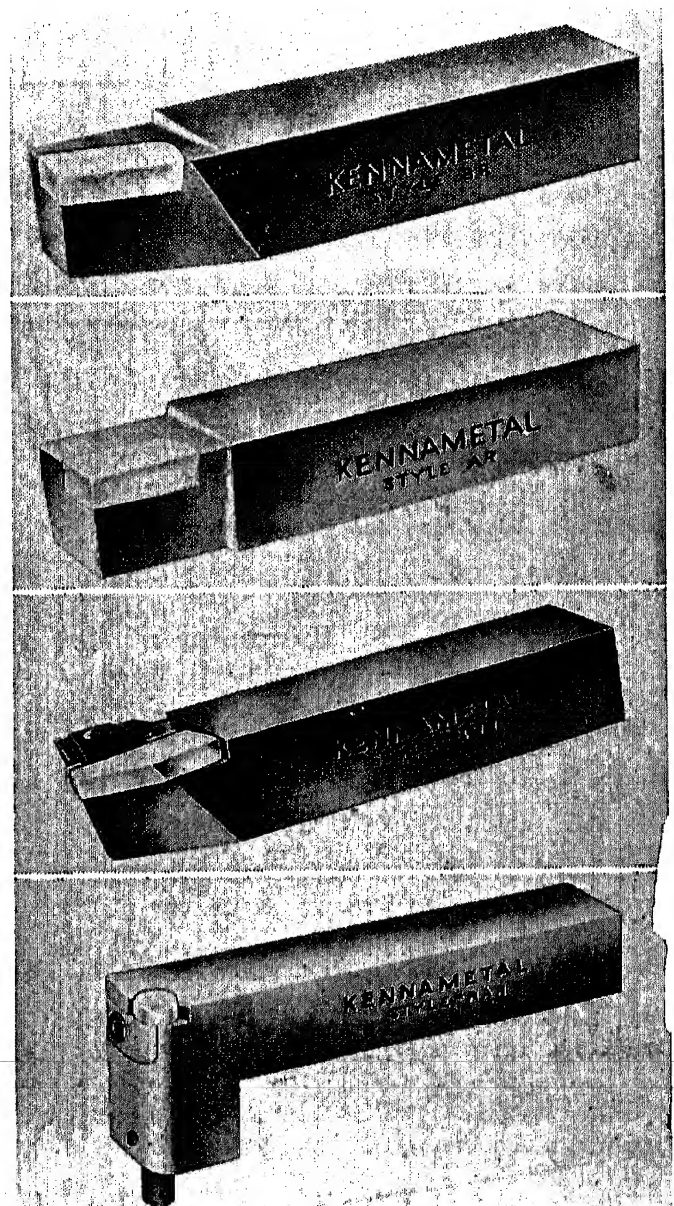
Typical cemented carbide tipped tools. (Courtesy Kennametal, Inc.)
